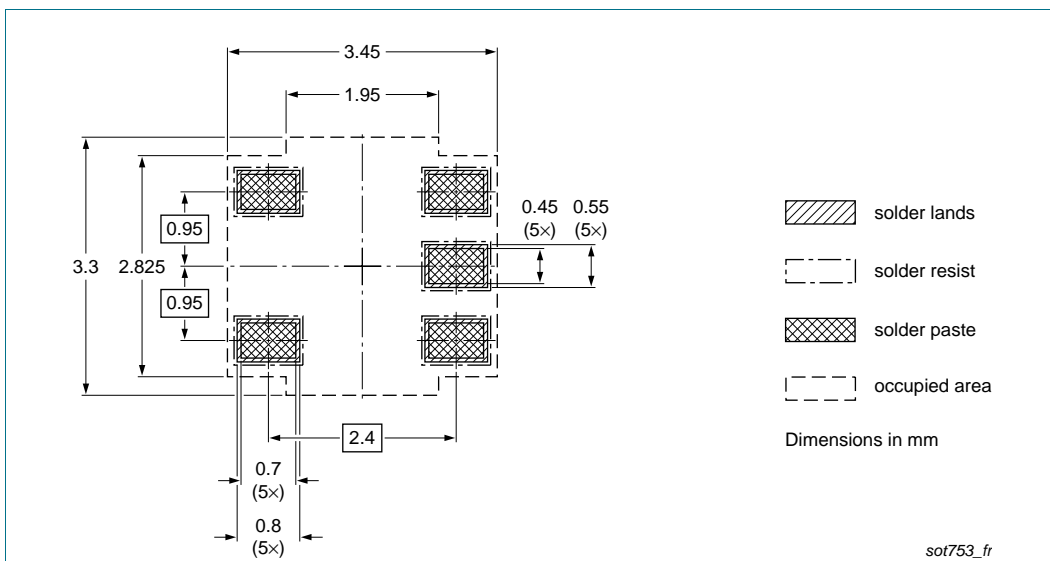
Reflow soldering footprint SOT753 (SC-74A)
